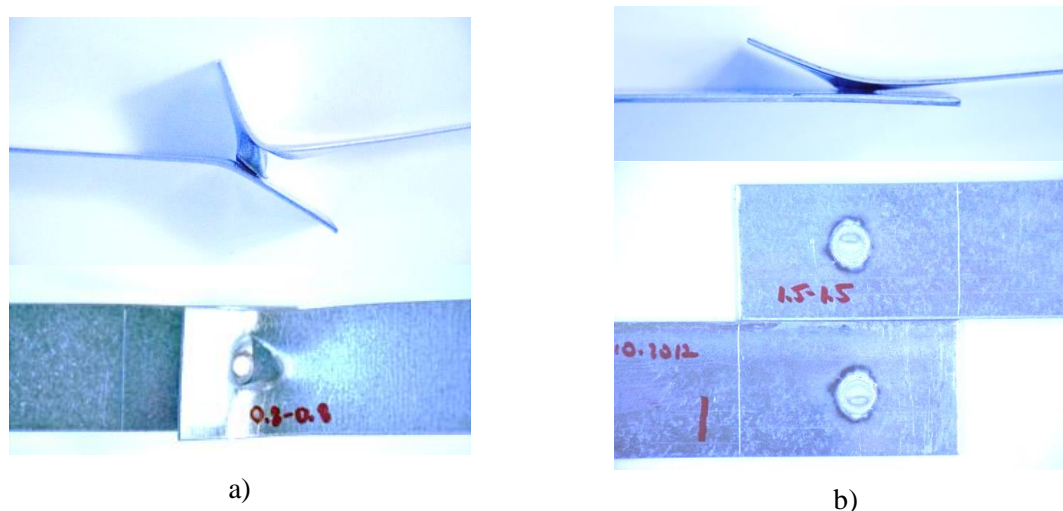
Failure modes of the spot welding specimens: a) full button pull-out, b) interfacial fracture.
